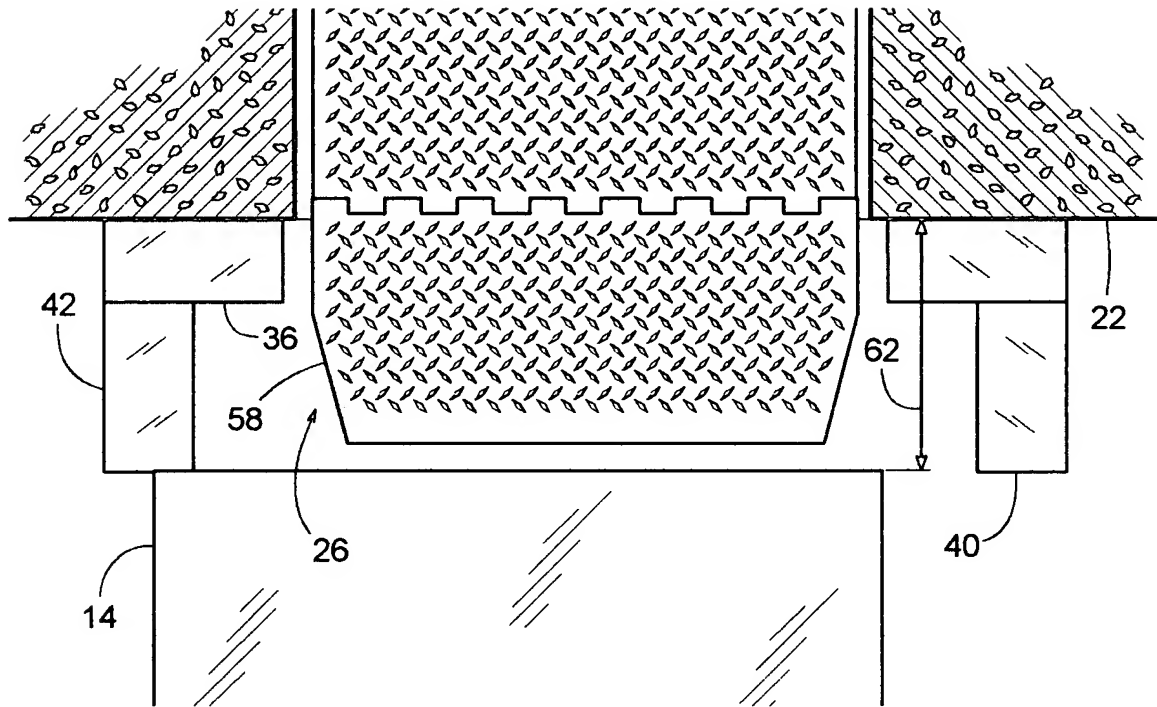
is a cross-sectional view of a lead-in bumper assembly for a loading dock. The assembly is mounted on a concrete base 14. A central bumper 26 is shown in cross-section, featuring a top surface 36 with a series of rectangular protrusions and a bottom surface 58. The bumper 26 is flanked by two side supports 22. The left side support 22 is connected to the base 14 by a vertical post 42. The right side support 22 is connected to the base 14 by a vertical post 40. A vertical dimension line 62 indicates the height of the side support 22. The top surface of the bumper 26 is covered with a material having a diagonal hatched pattern, while the side supports 22 have a cross-hatched pattern. The base 14 is shown with diagonal hatching.
